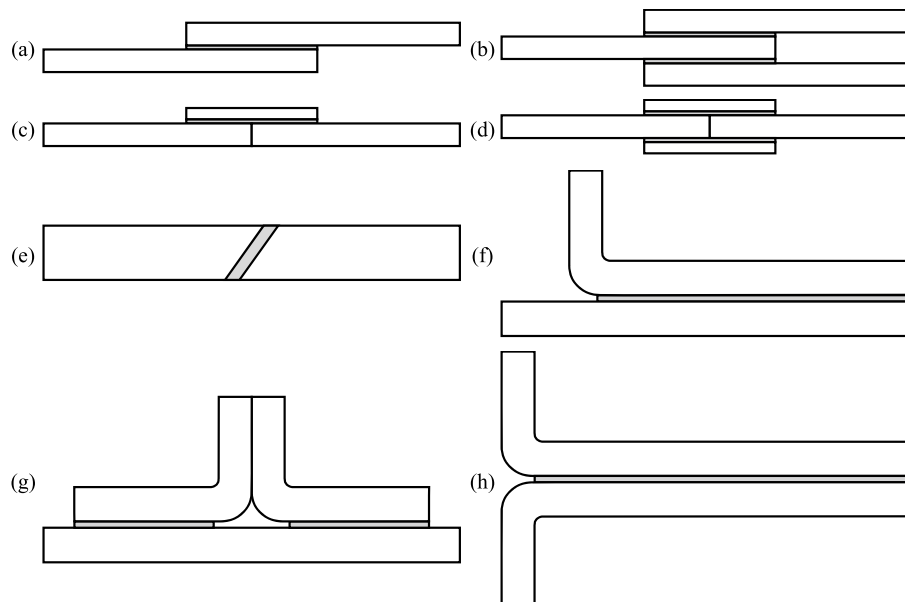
Typical geometry of SLJ (a), DLJ (b), SJ (SJ) (c), DSJ (d), ScJ (e), single-L joints (f), T-joints (g) and T-peel joints (h).
